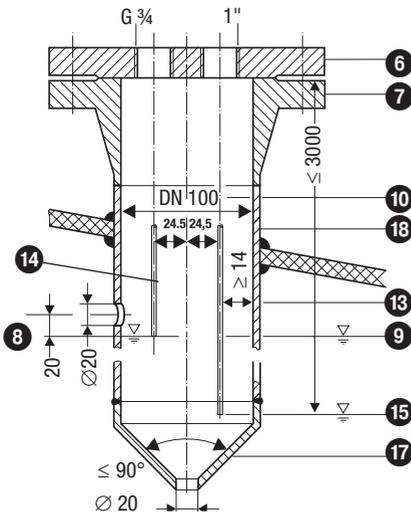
Protection tube (provided on site) for installation inside the boiler and in combination with other GESTRA equipment
